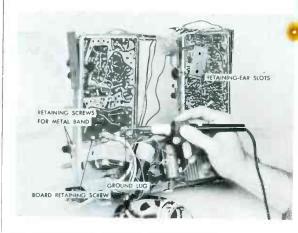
Removing Connections to Printed Board in TV Receiver.
